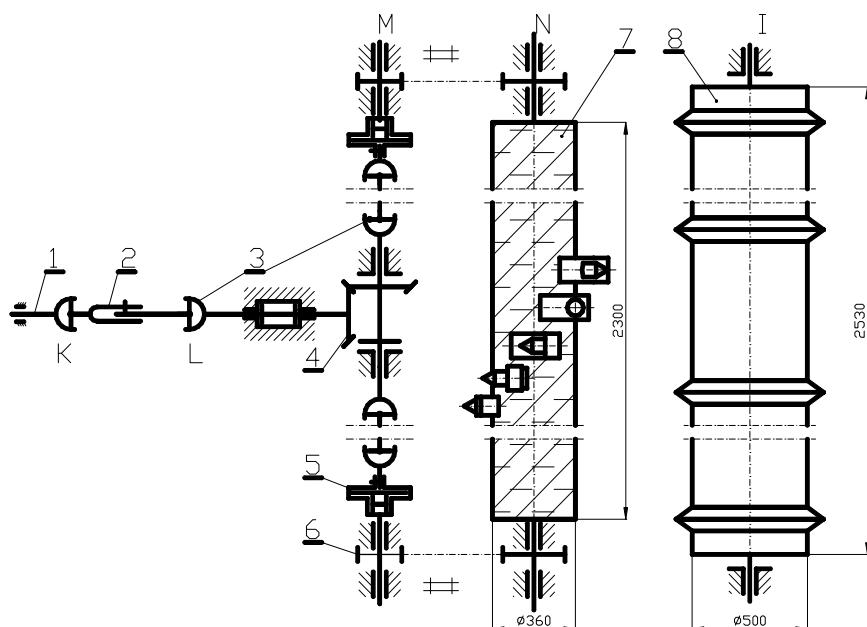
The kinematic diagram of the crushing machine MJS-2.5 DT: 1 – PTO, 2 – Cardan shaft, 3 – universal couplings, 4 – T-transmission, 5 – hydraulic clutch, 6 – chain transmission, 7 – milling drum, 8 – rear drum
